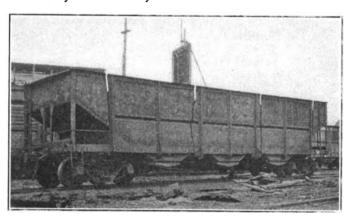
Car with Rivets and Plates Cut Ready to Be Broken Down
